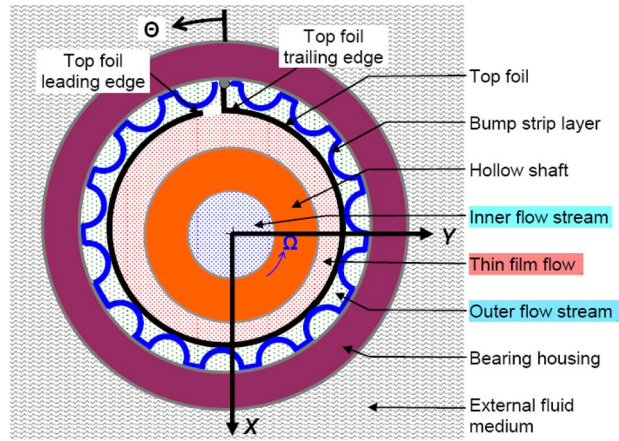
Schematic view of gas foil bearing, components, and coordinate system
